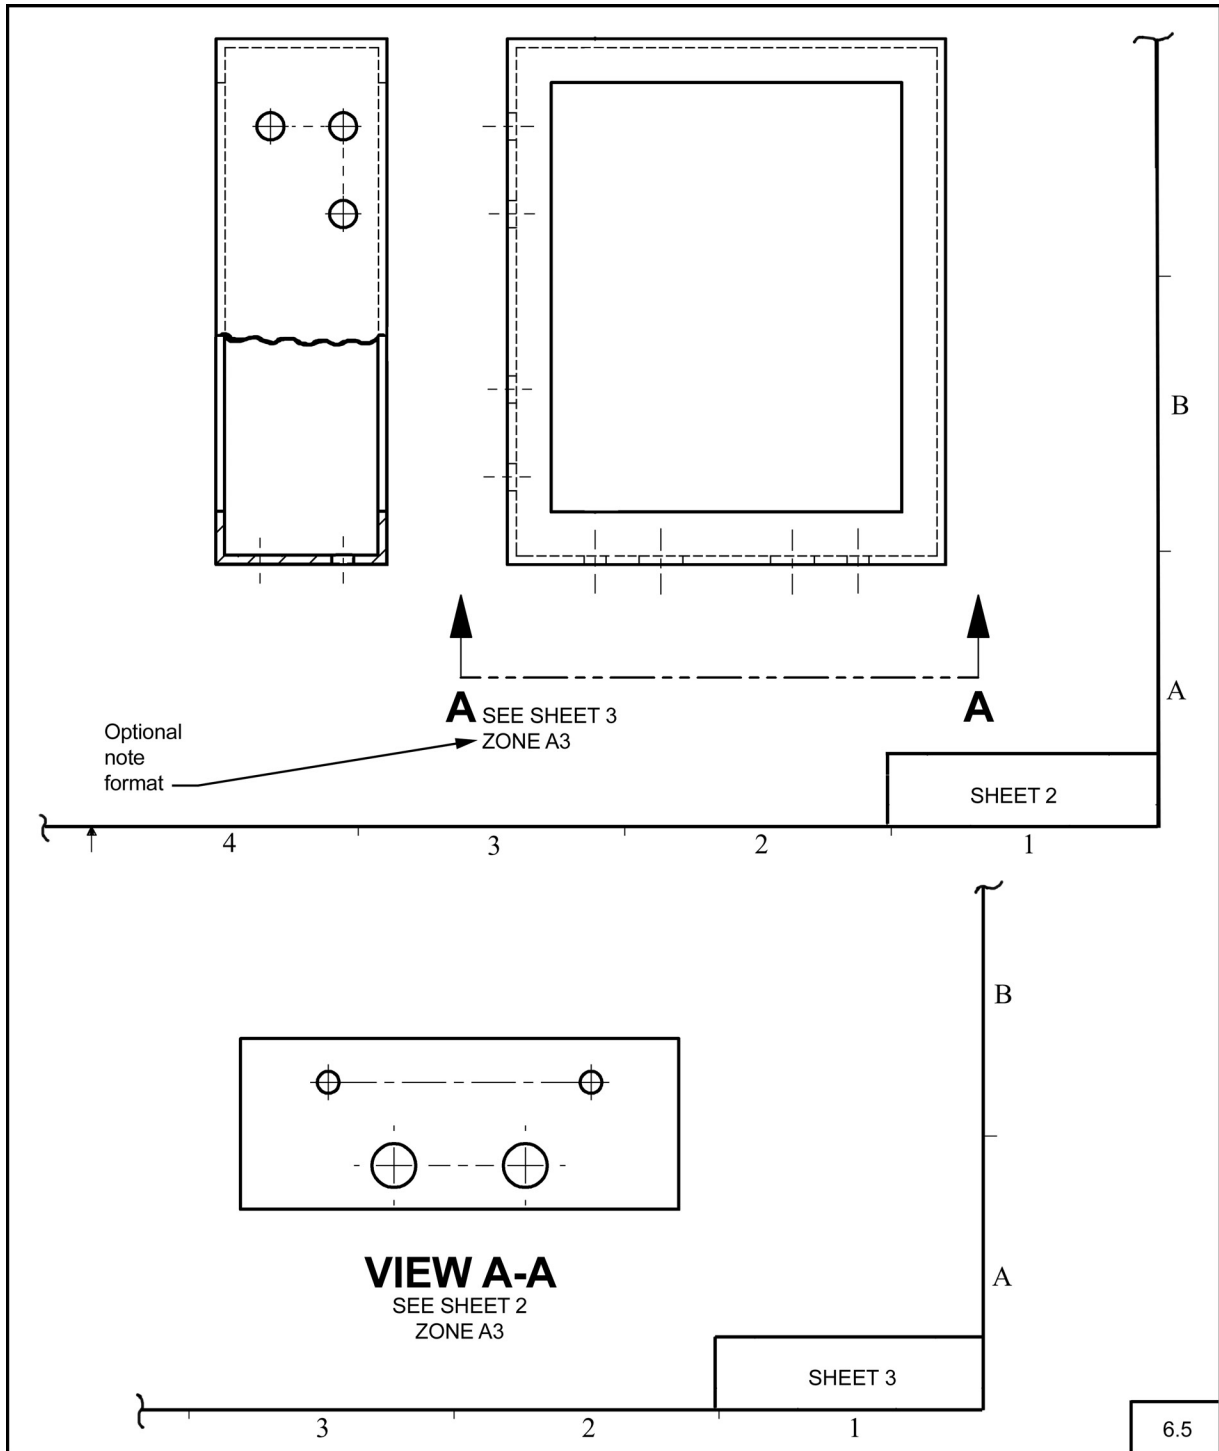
Removed View When Multiple Drawing Graphic Sheets Are Used
